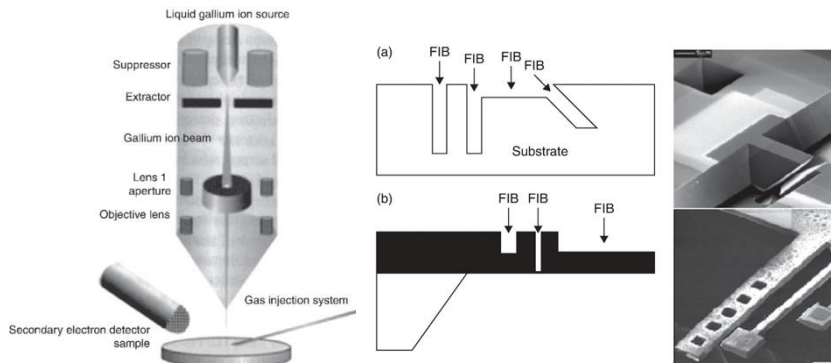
Schematic illustration of focused ion beam system and two examples for FIB milling: milling pattern (a) and milling structure (b) [56]
